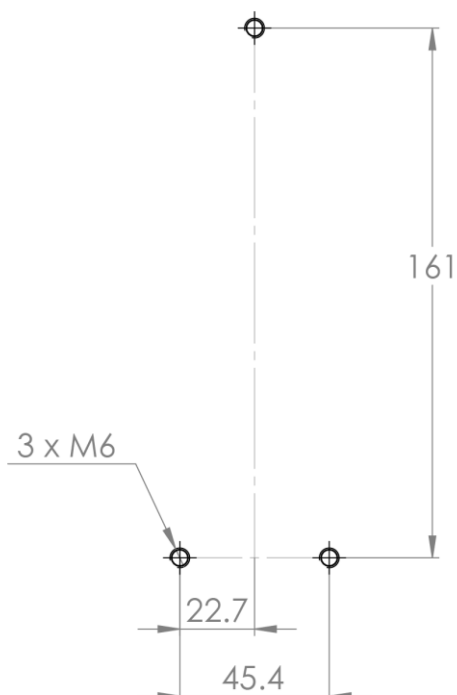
Remote Pendant Cradle Mounting Hole Pattern (mm)
